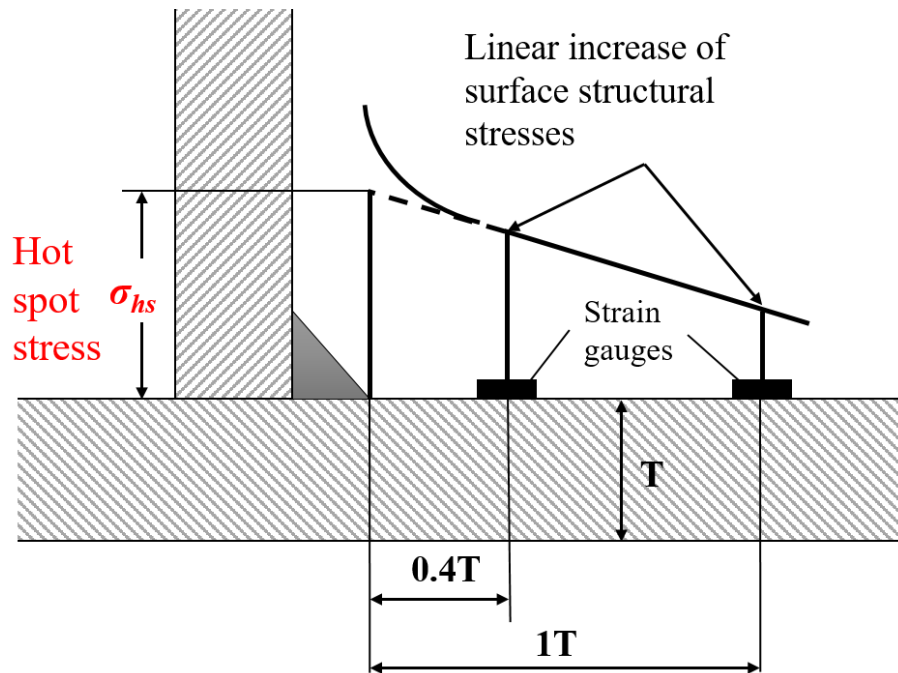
Experimental method of determining the hot spot stress in welded joints
